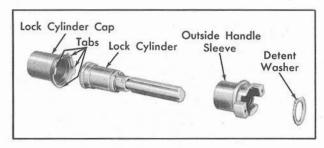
Front Door Outside Handle Lock-Disassembled
